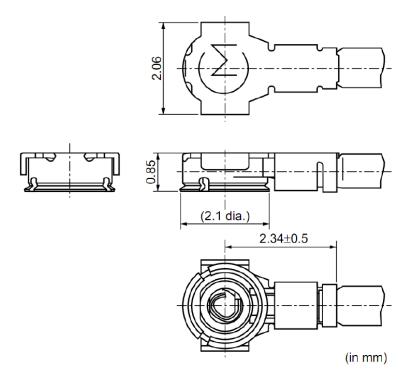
Dimensions of Mated Plugs (Ø0.81/Ø1.13 mm Coaxial Cables) (Unit: mm)
